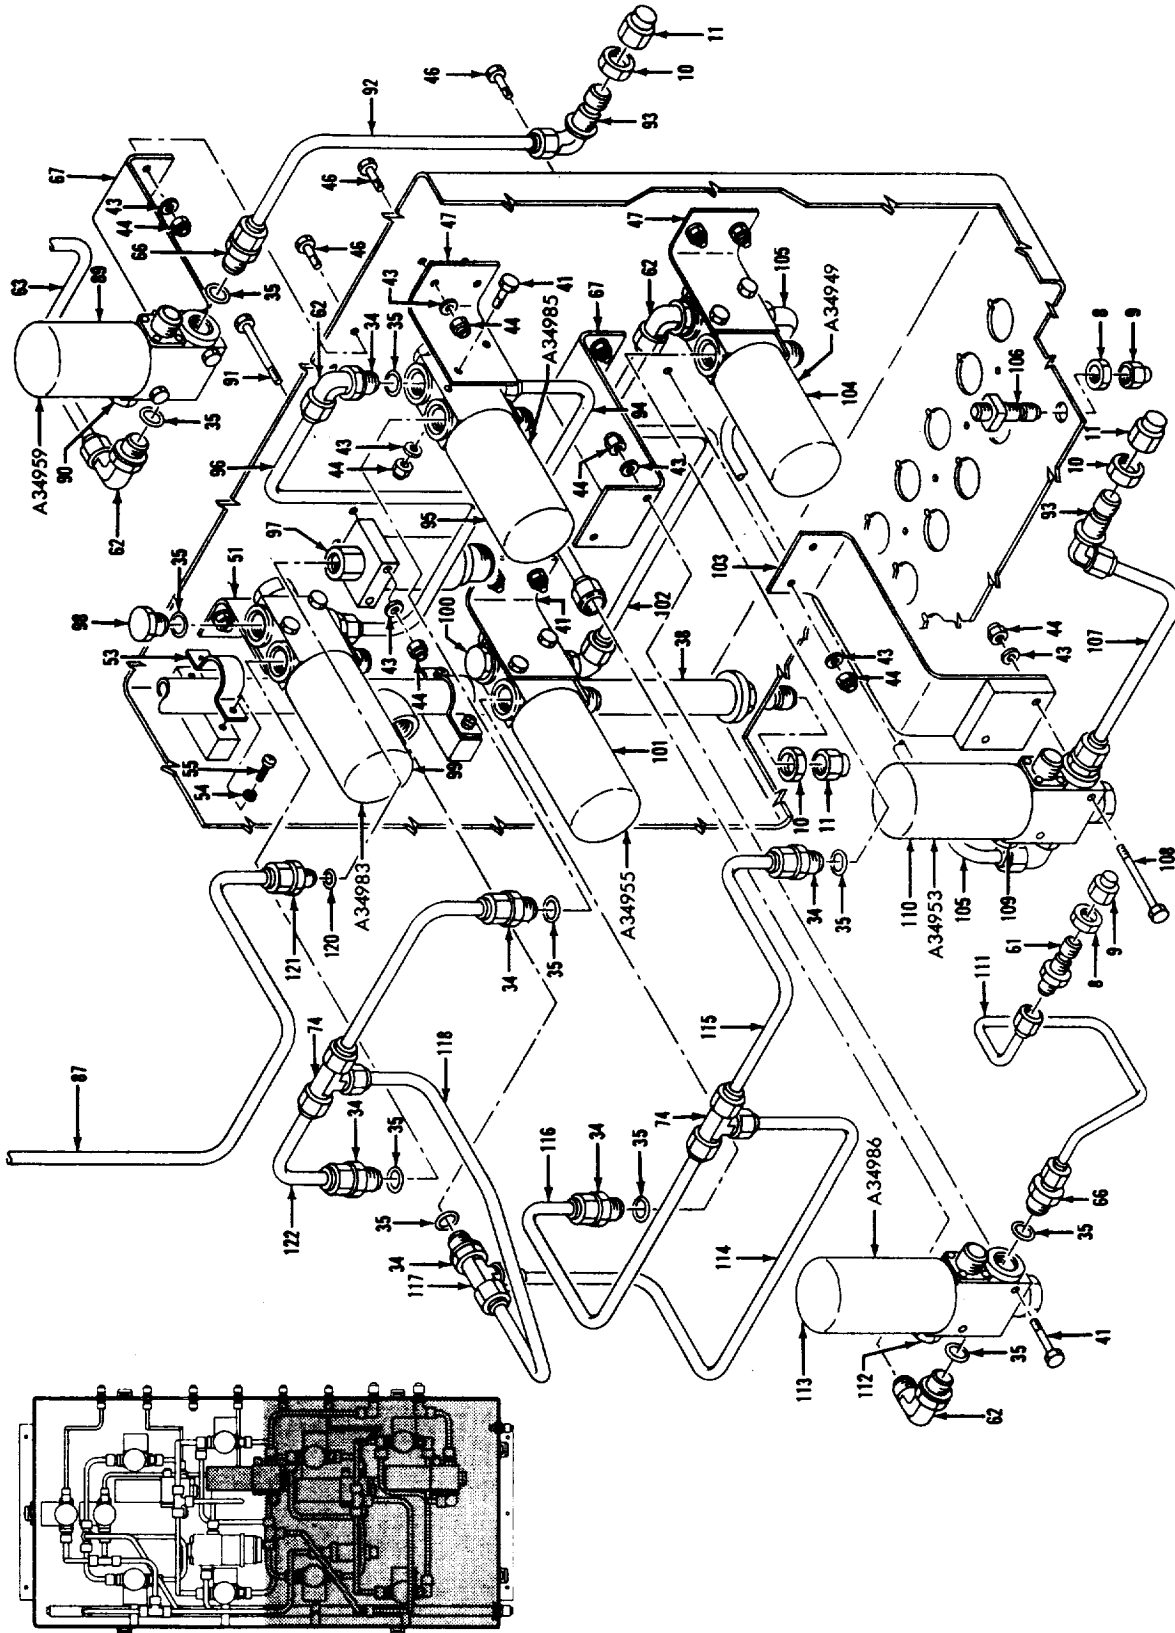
Pneumatic Box Assembly (Sheet 4 of 7)
